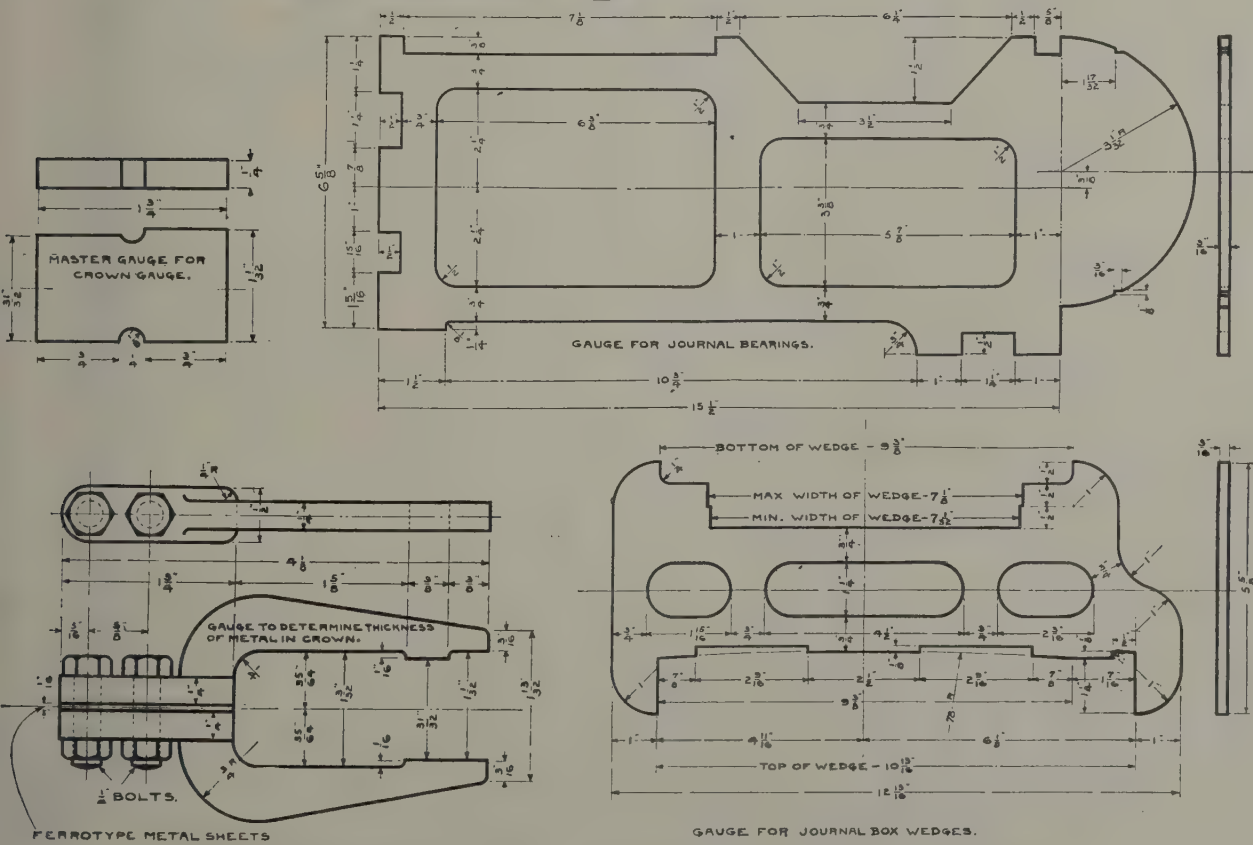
Gages for 6 in. by 11 in. Journal Bearings and Wedges. (M. C. B. Sheet 14A.)
